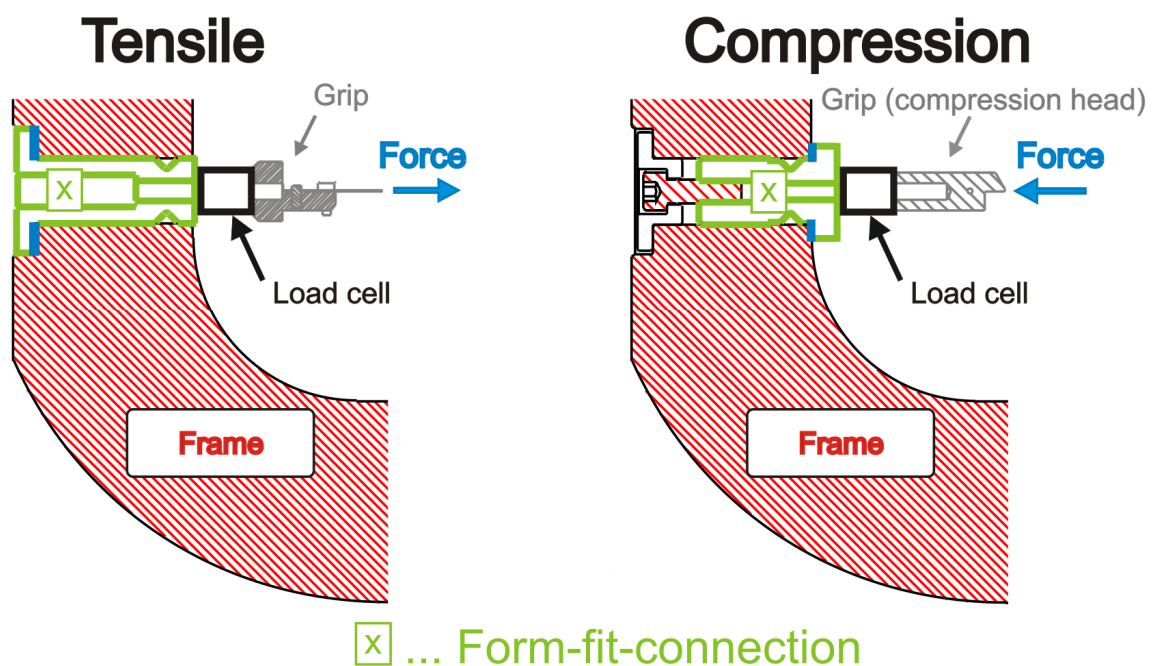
Technical cross sectional drawing of a part of the tensile and compression machine. The different form-fit-connections for tension and compression are drawn in green. The force transfer to the frame is pictured with a blue line.
